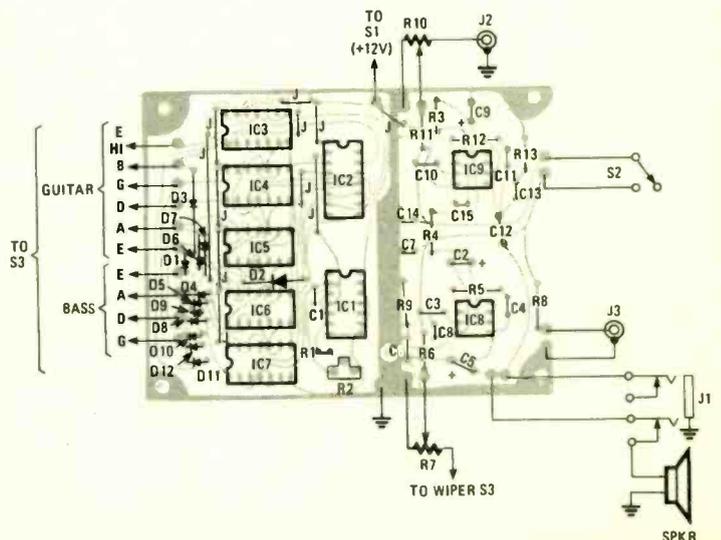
DO NOT FORGET to install the 11 jumper wires on the component side of the board.
